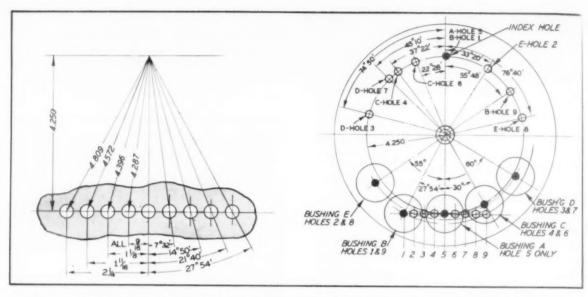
At the left, encircled, are nine equally spaced holes, suggestive of close-center drilling in a typical workpiece. At the right is an indexing bushing plate such as may be used to adapt rotary bushings for close-center drilling. The center of the bushing plate is 4.25 in. from the center line of the holes to be drilled, and figures for calculation may be had from the sketch at right. Procedures for design are contained in the text.
